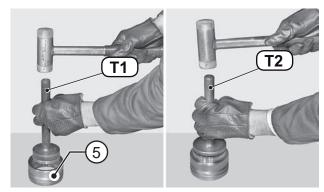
Using tools T1 (See drawing T1 p. 50) and T2 (See drawing T2 p. 50), introduce the seal ring (9) and bearing (7) into the bushing (5).
